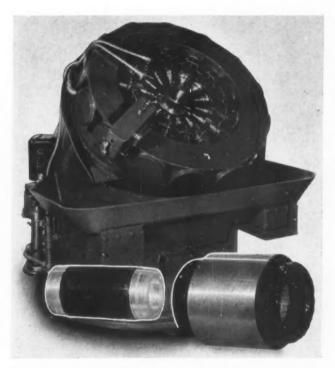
Inset shows shell-type, shaftless motor for spindle drive, a number of which are built into the piston drilling machine depicted
